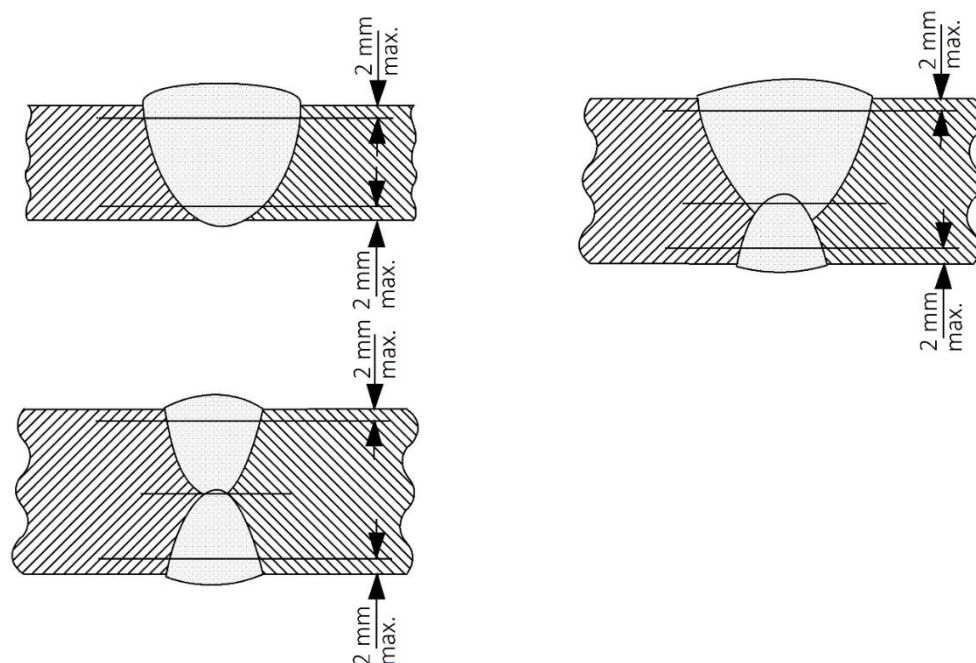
Examples of hardness test with rows of indentations in butt welds
